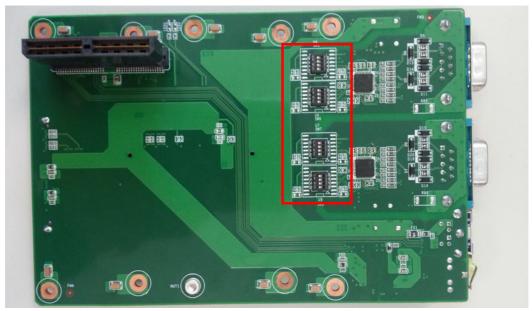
MIC-3329 Front 8HP XTM Board Jumper Locations
